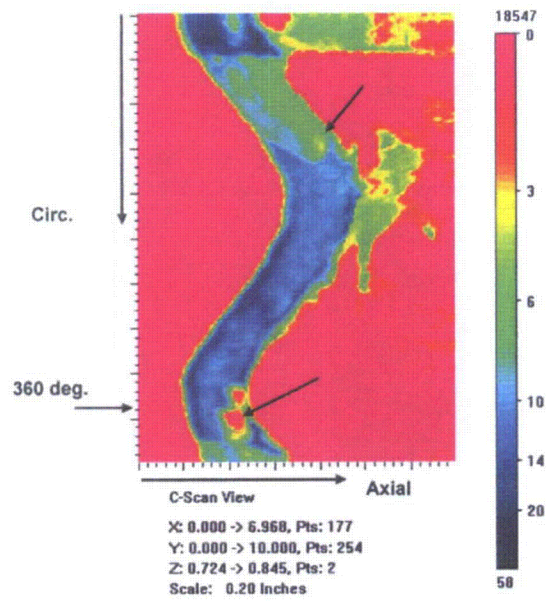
Nozzle 31, 500-kHz Immersion Data Showing Indications in the J-Groove Weld Material
